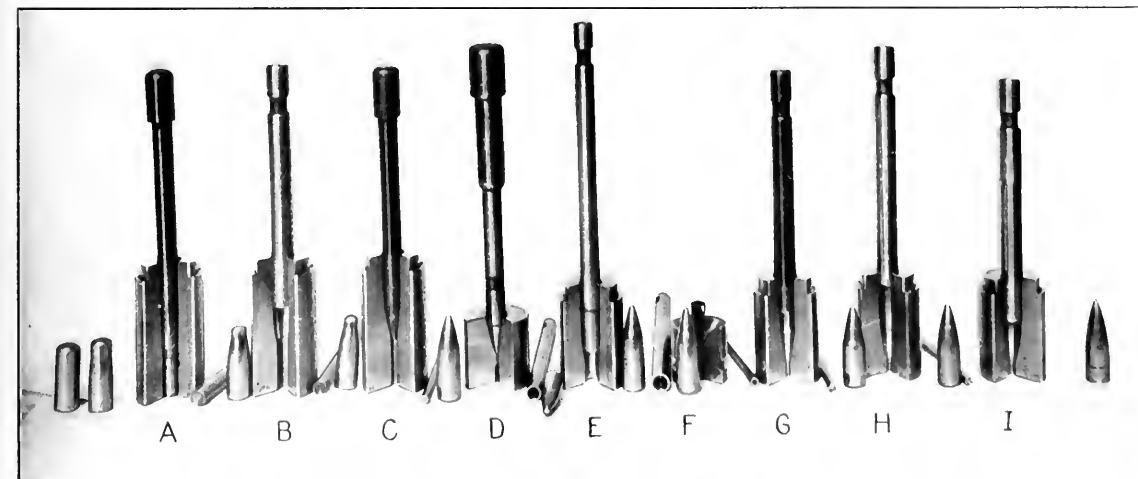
Illustration showing the Type of Dies and Tools used in the Machine shown in Fig. 6 for making Spitzer Bullets
